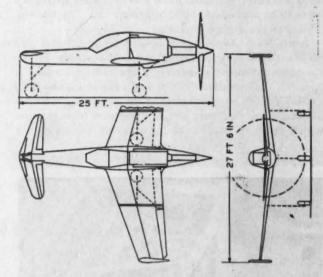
Design for single-seater, single engined canard-type fighter aircraft
